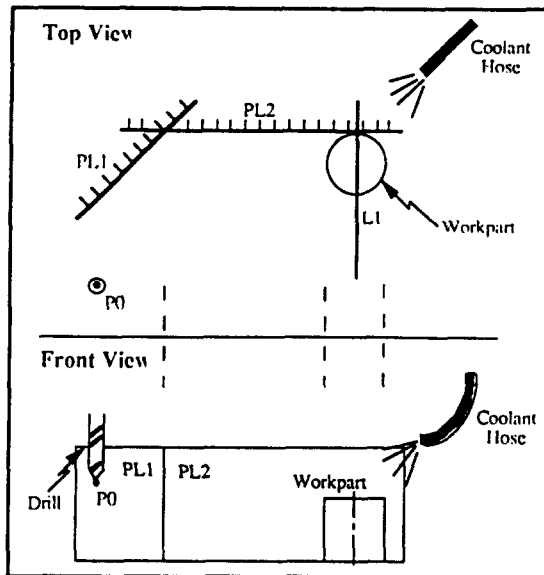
Engineering drawing of Top and Front views of the scenario environment.
